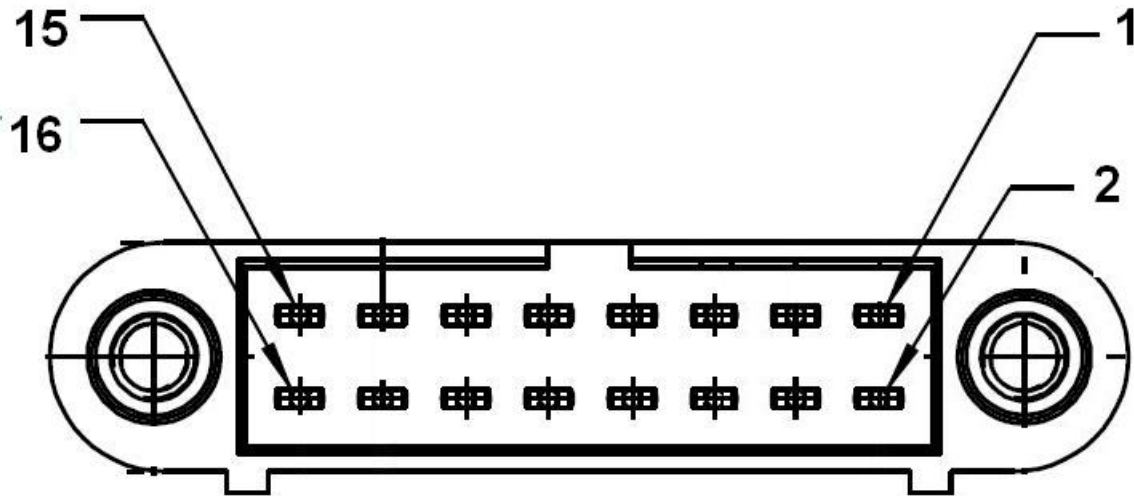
Front view of the mechanism connector M80-5101642 on the CCBu20.
